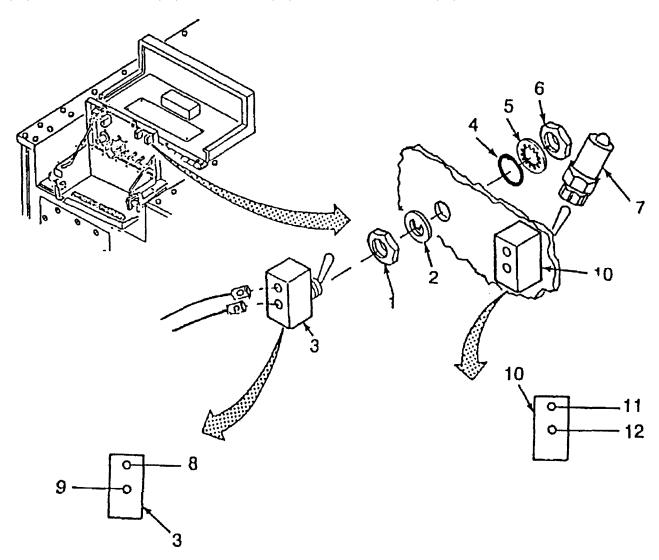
Control Box Assembly, Purge and Flame Reset Switches
